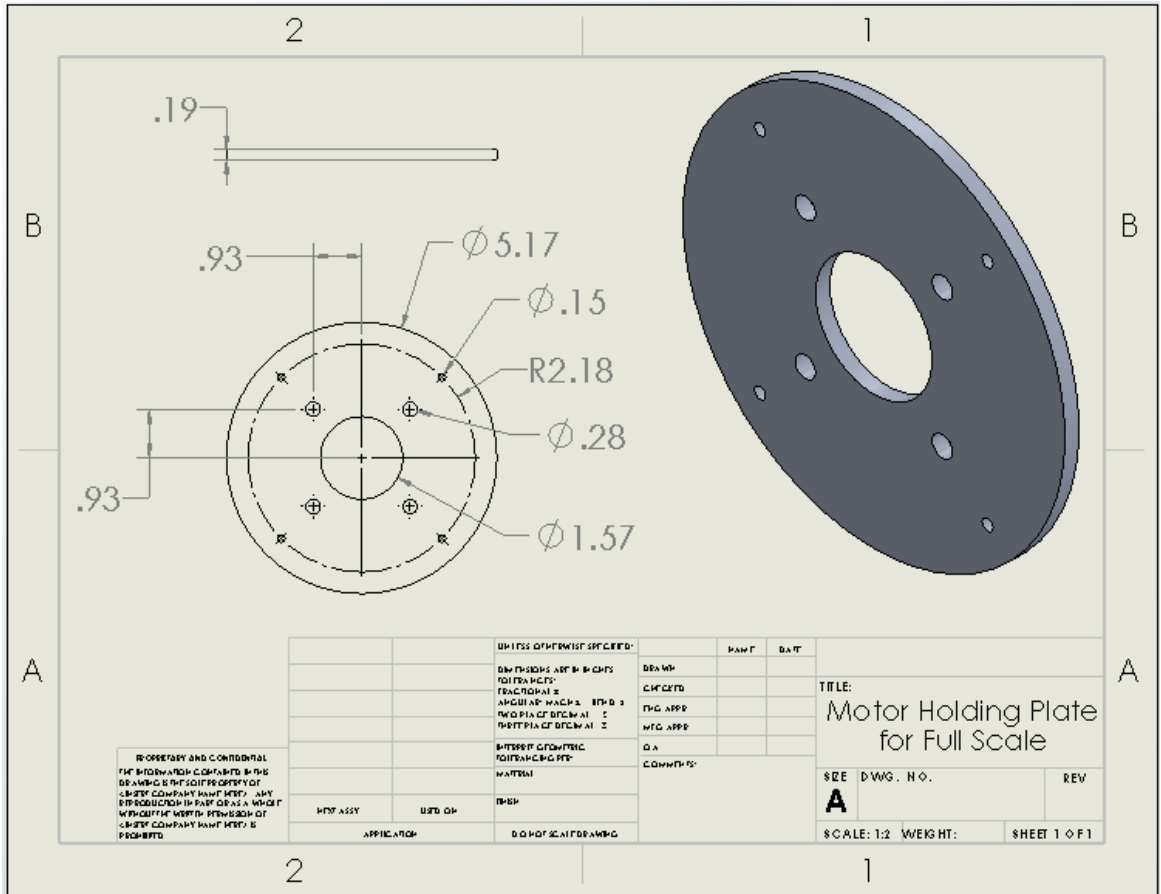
Drawing of Full Scale Motor Holding Plate
